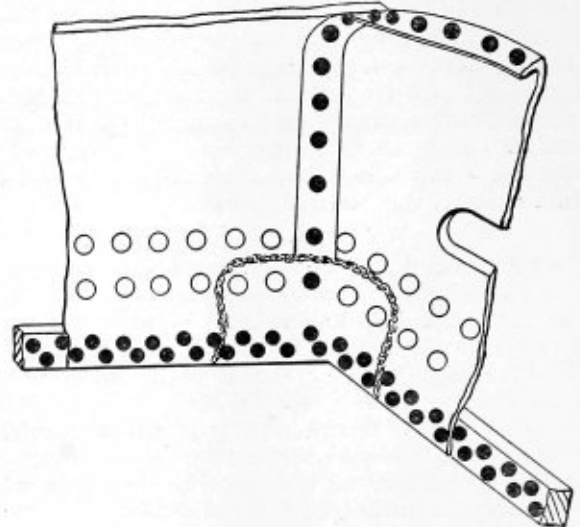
Application of Mud Ring Corner Patches; Gas or Electric
